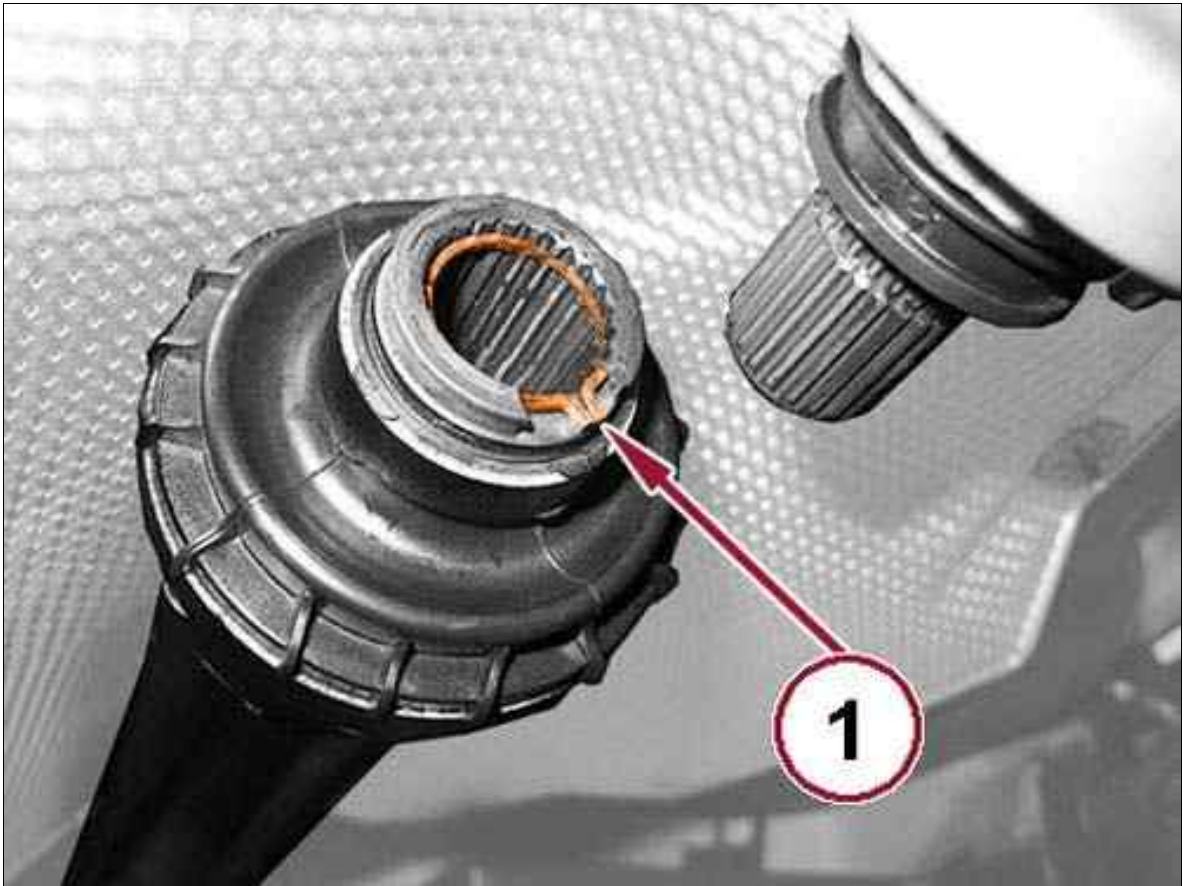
Protective Sleeve At Center Propeller Shaft Joint
